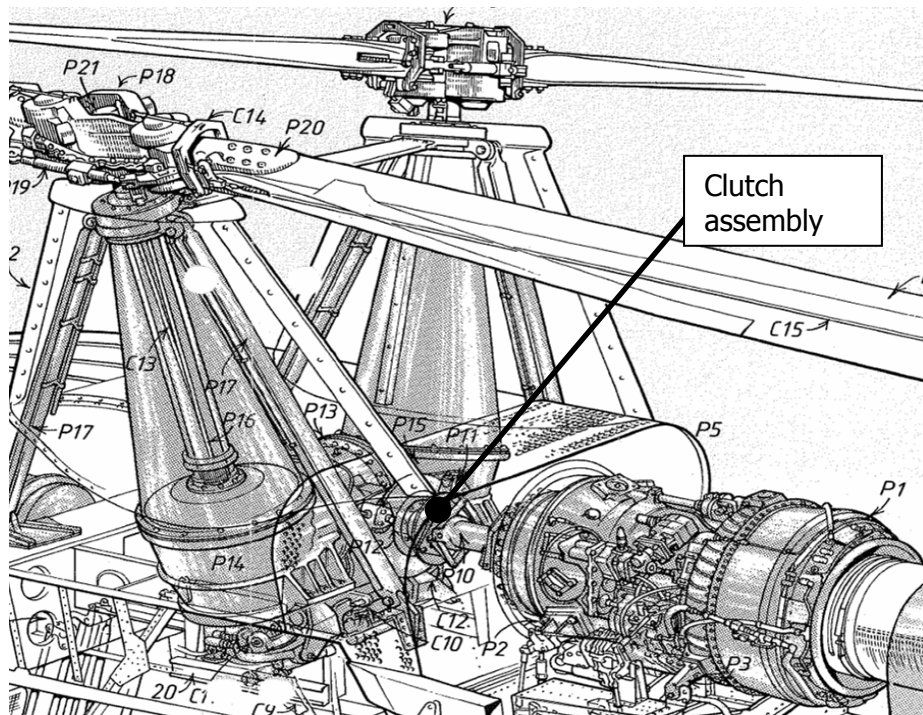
Schematic of the engine, clutch and gearbox assembly and both main rotor units.
